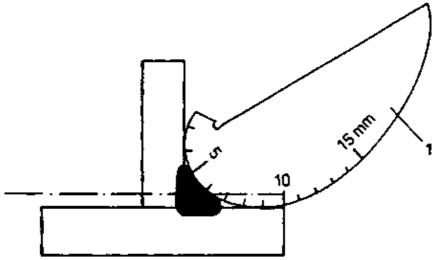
Weld gage (1) for measuring the fillet weld height
